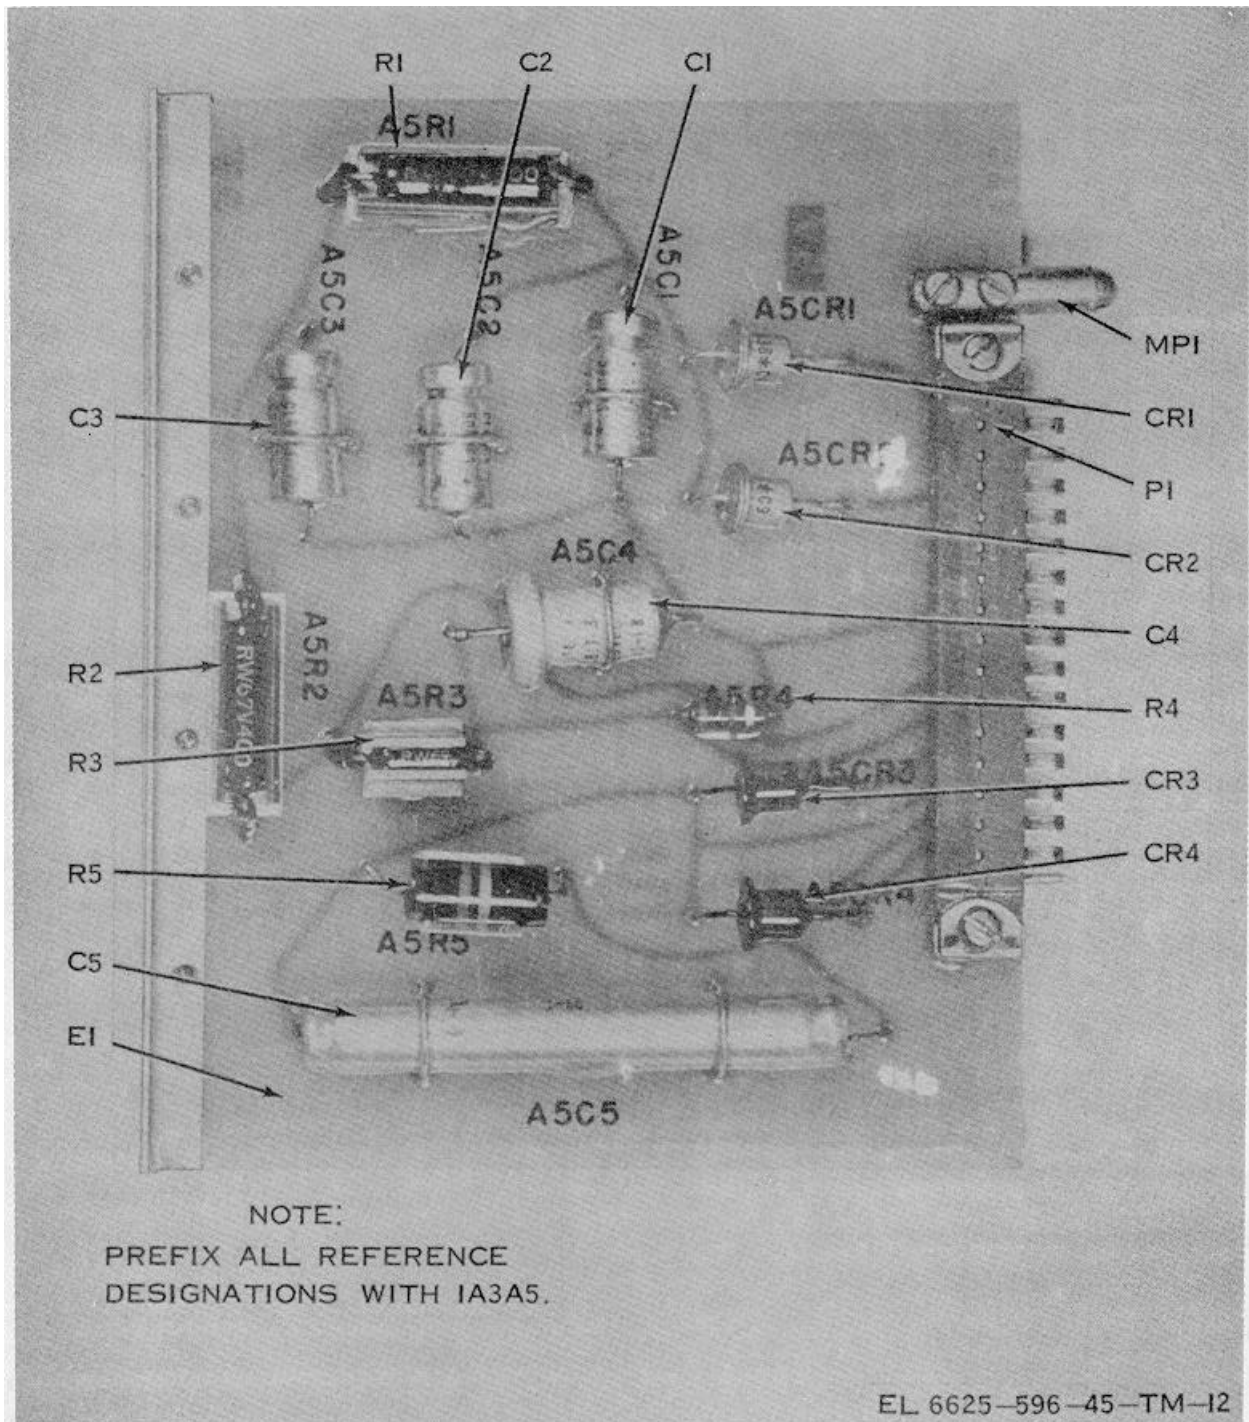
Positive power supply assembly 1A3A5, parts location.
